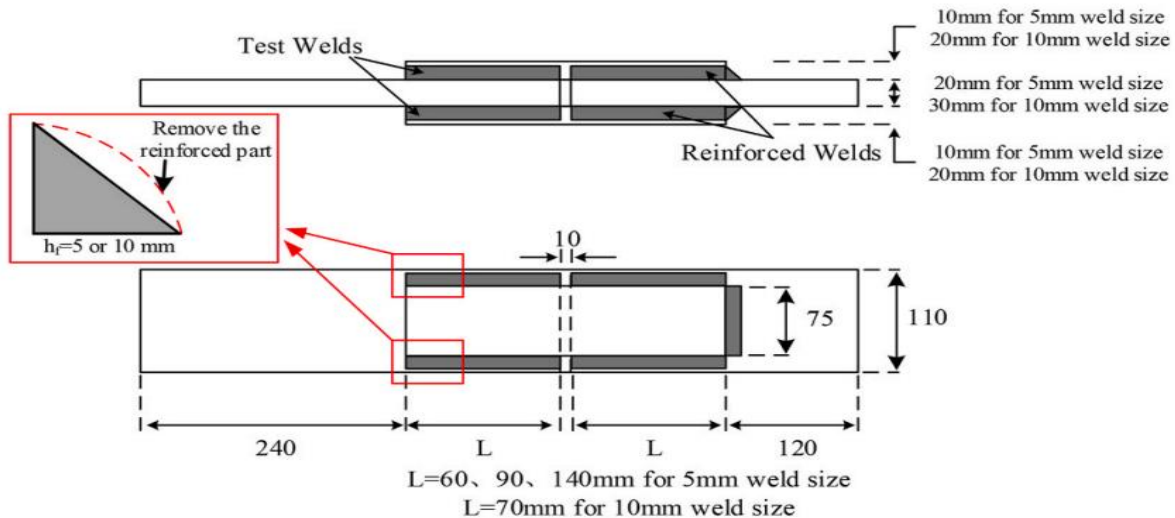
Longitudinal lap-welded fillet joint [38].
